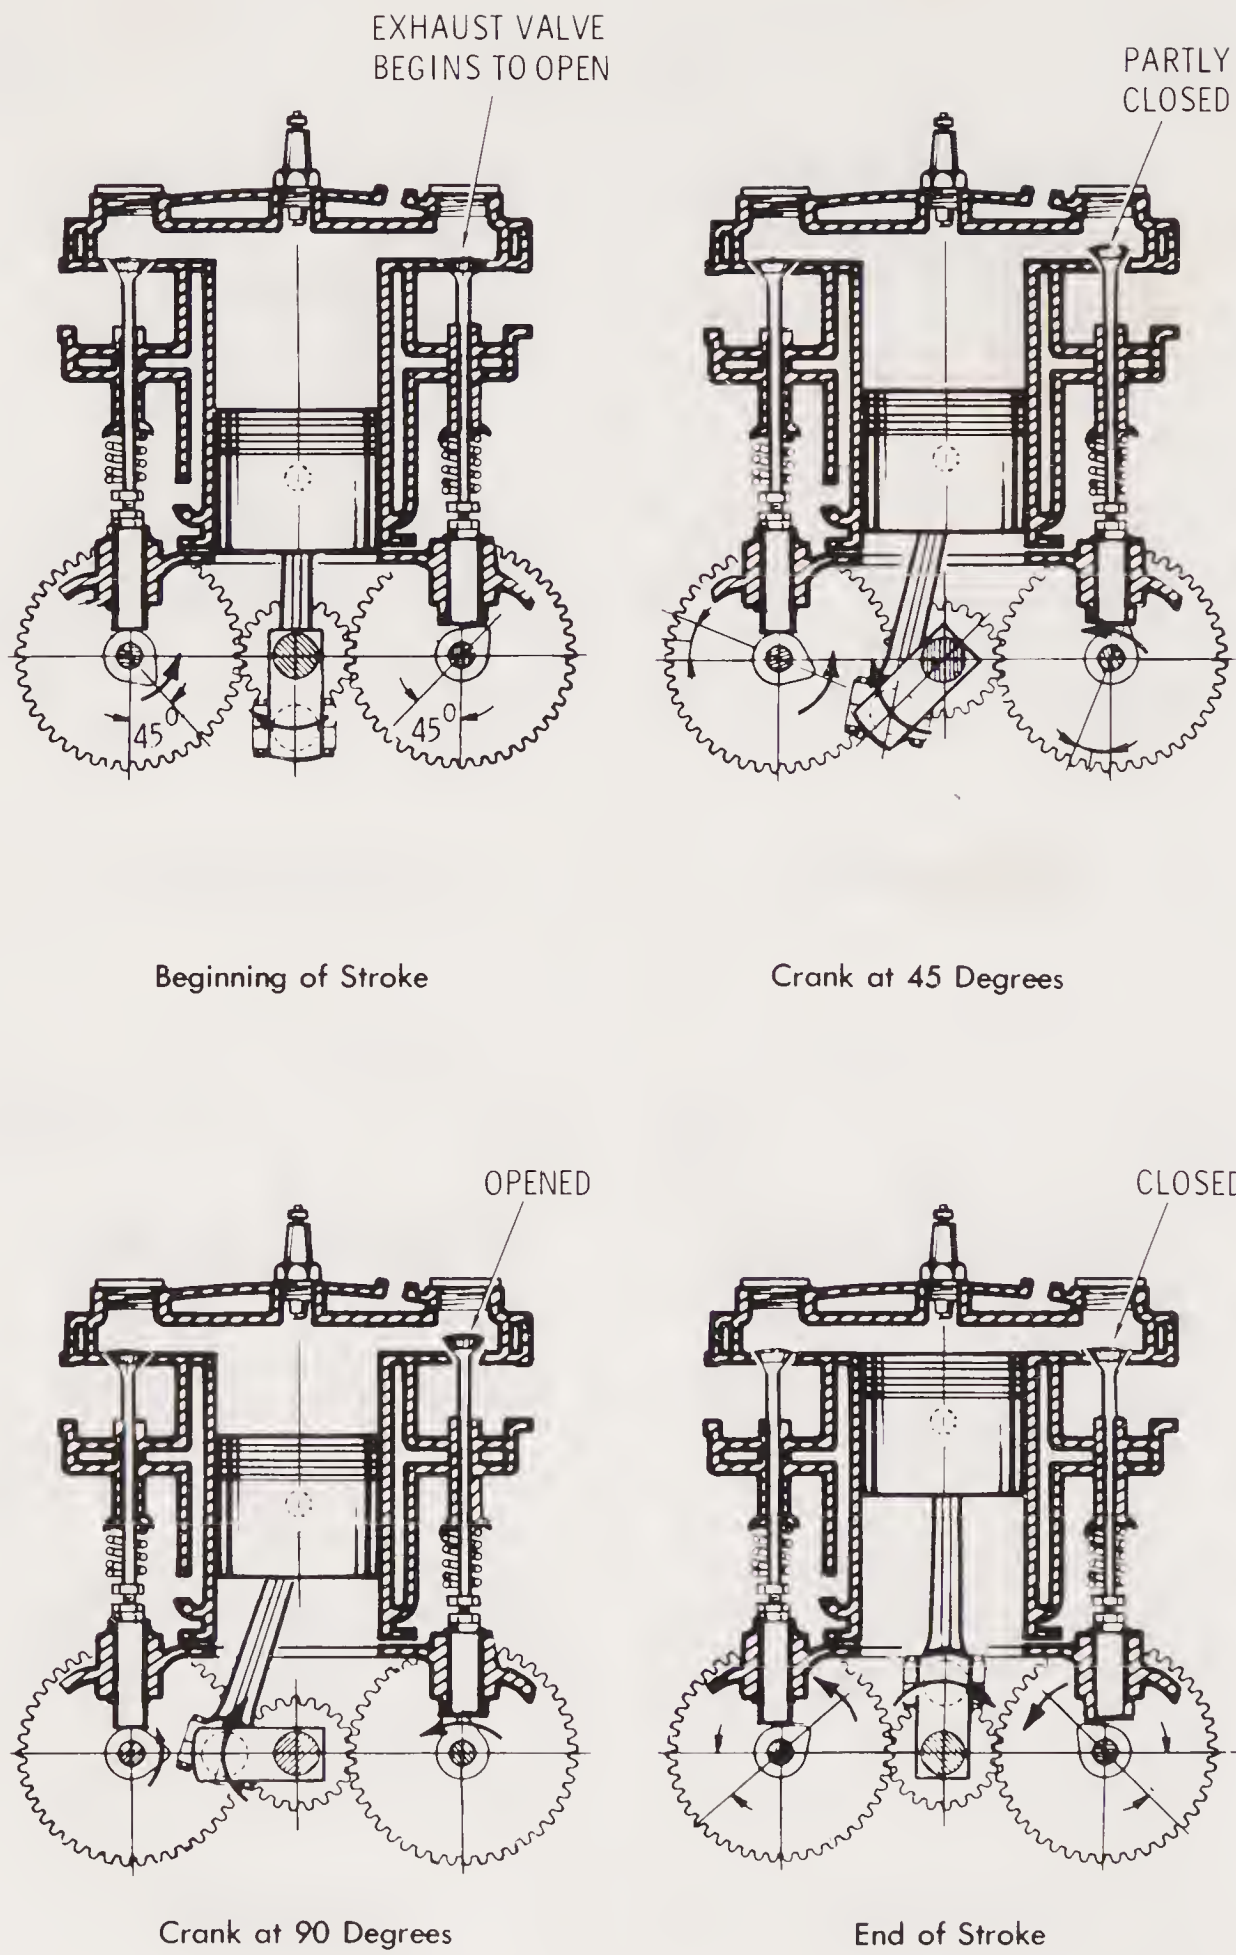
The exhaust stroke in a four-stroke engine.
